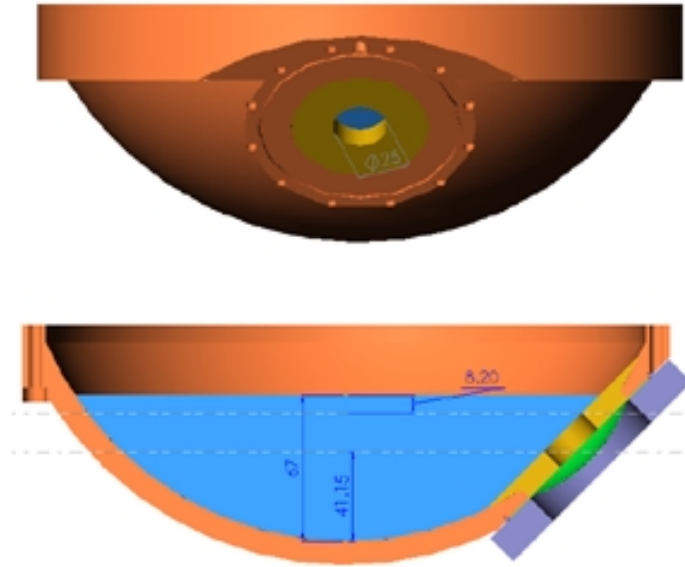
Lower head with lateral hole with 25 mm diameter
